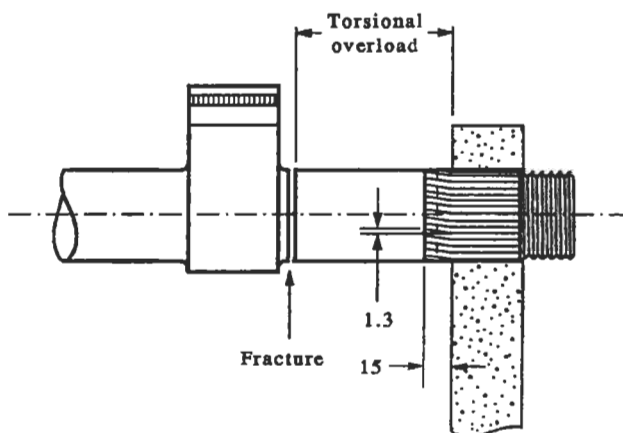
Side view of the shaft, showing the plane of the fracture and the region of torsional overload. Dimensions in mm.
